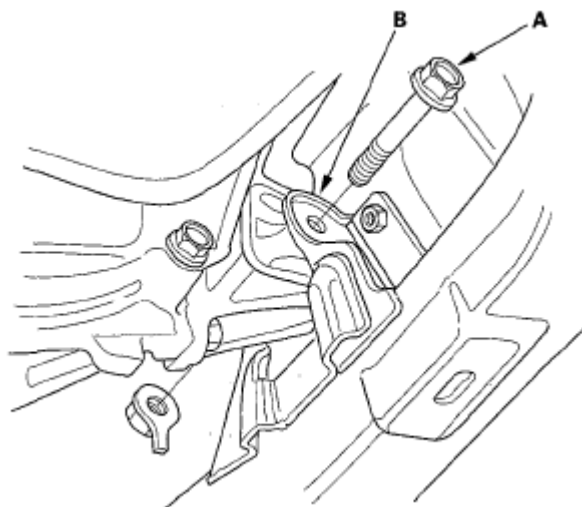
Identifying Front Engine Mount Bracket And Bolt
